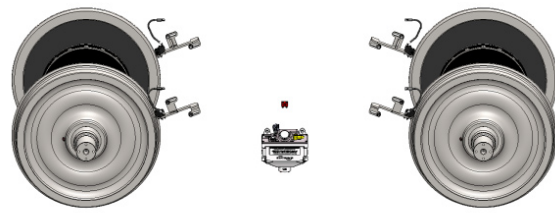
System of wheel flange lubrication in a vehicle – the direct and contactless type
